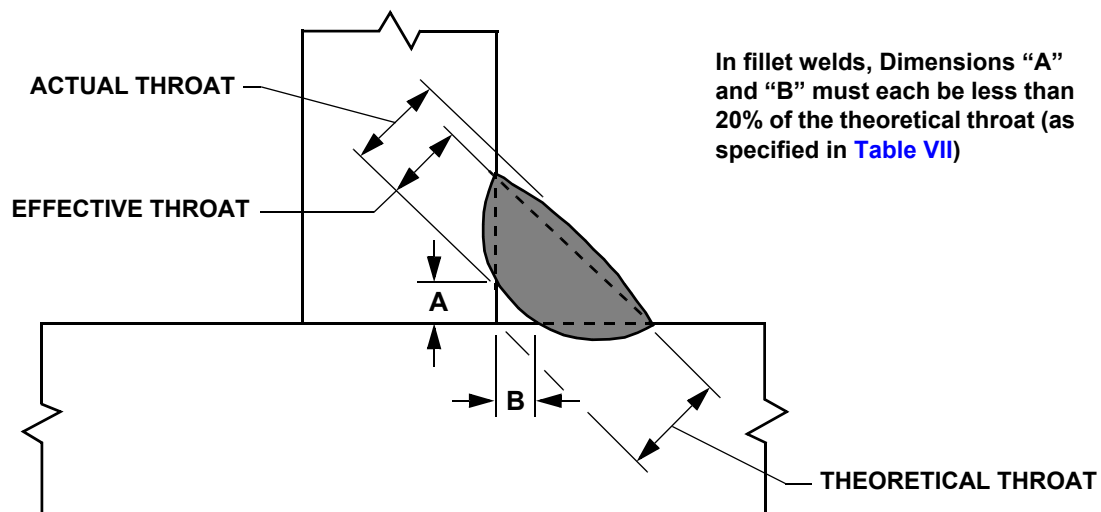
FILLET WELD WITH INCOMPLETE PENETRATION TO THE ROOT
